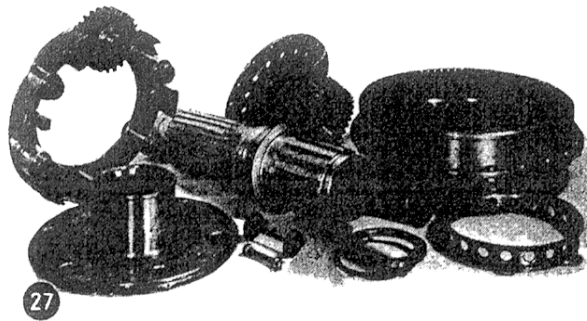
Propeller reduction gear parts, left to right, pinion, cage hub, propeller shaft, trunnion and cage bolts, stationary reduction gear, cage nut and lock, reduction driving gear, and accessory driving gear.
